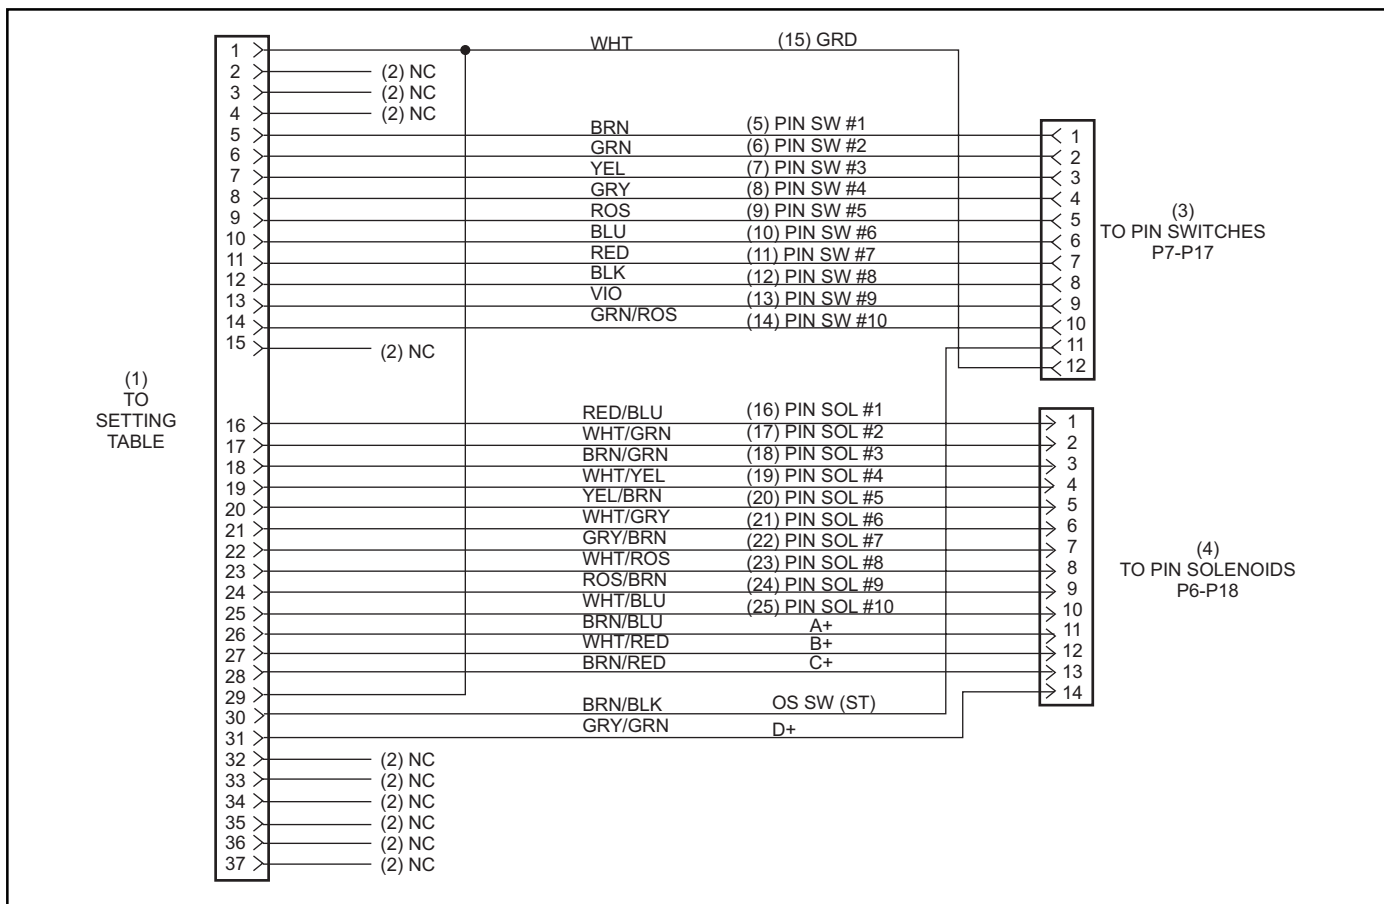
External Setting Table Cable Assembly (Part No. 47-245421-004)
